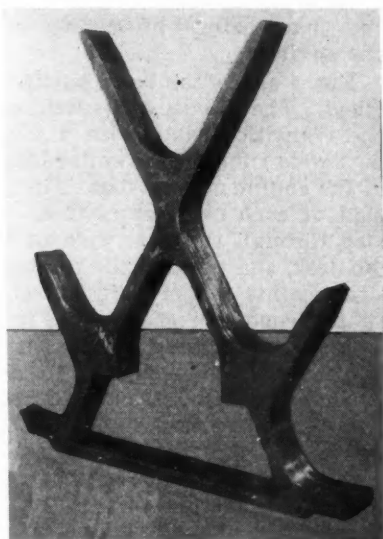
Flame-cut main-frame member of 1000-hp. engine block
